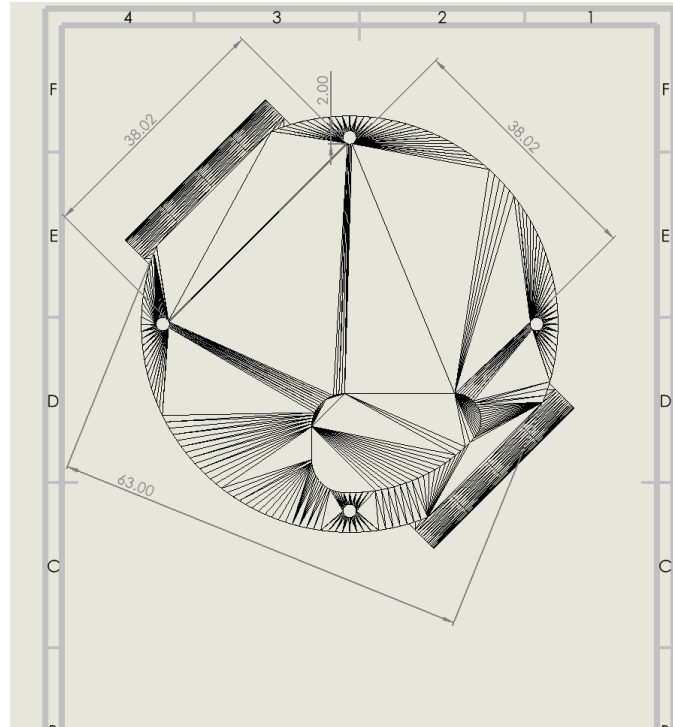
Outline drawing of the flange for connecting the instrument's actuator
